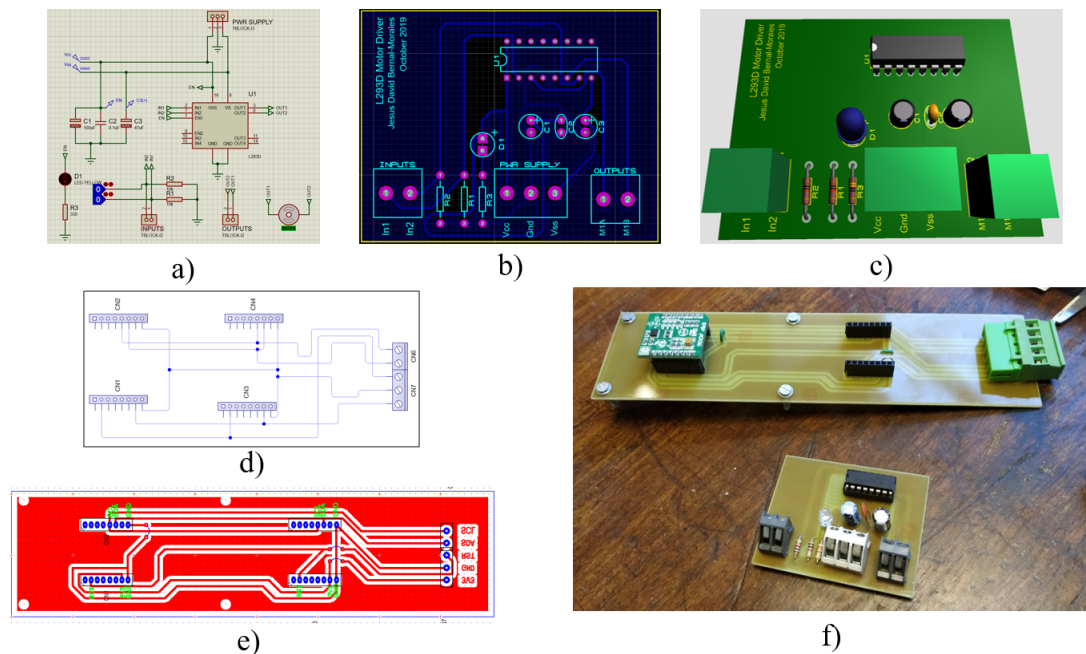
Circuitry modelling process. a) Motor driver schematic diagram. b) Motor driver PCB diagram. c) Motor driver 3D PCB. d) Sensors' connector schematic diagram. e) Sensors' connector PCB diagram. f) Completed PCBs
